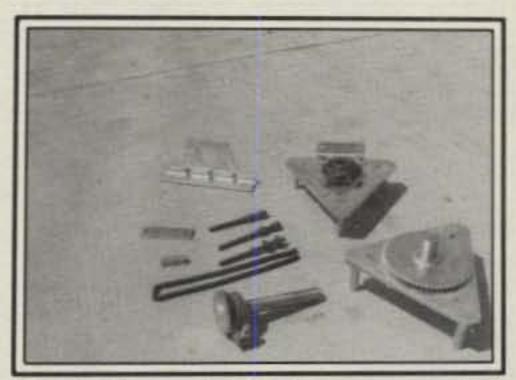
The mechanical components that make up the antenna rotating system prior to assembly.
